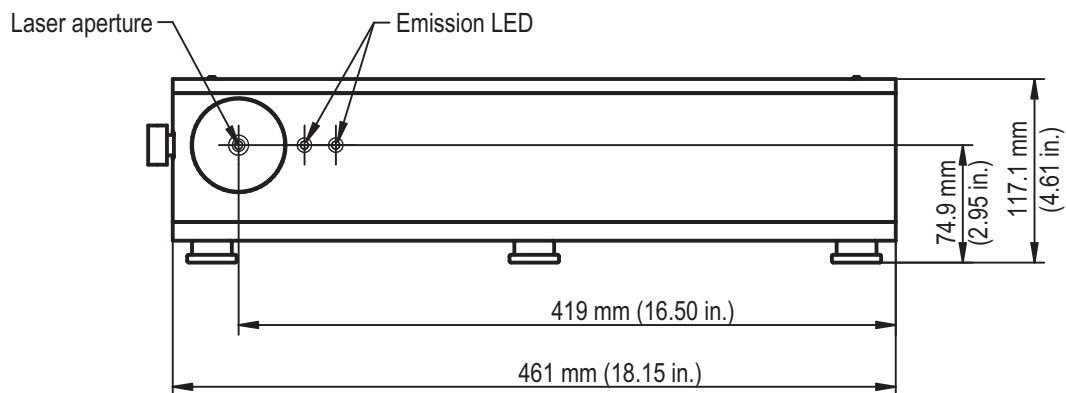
Laser Head Dimensions (8 W, 25 W, or 42 W)
